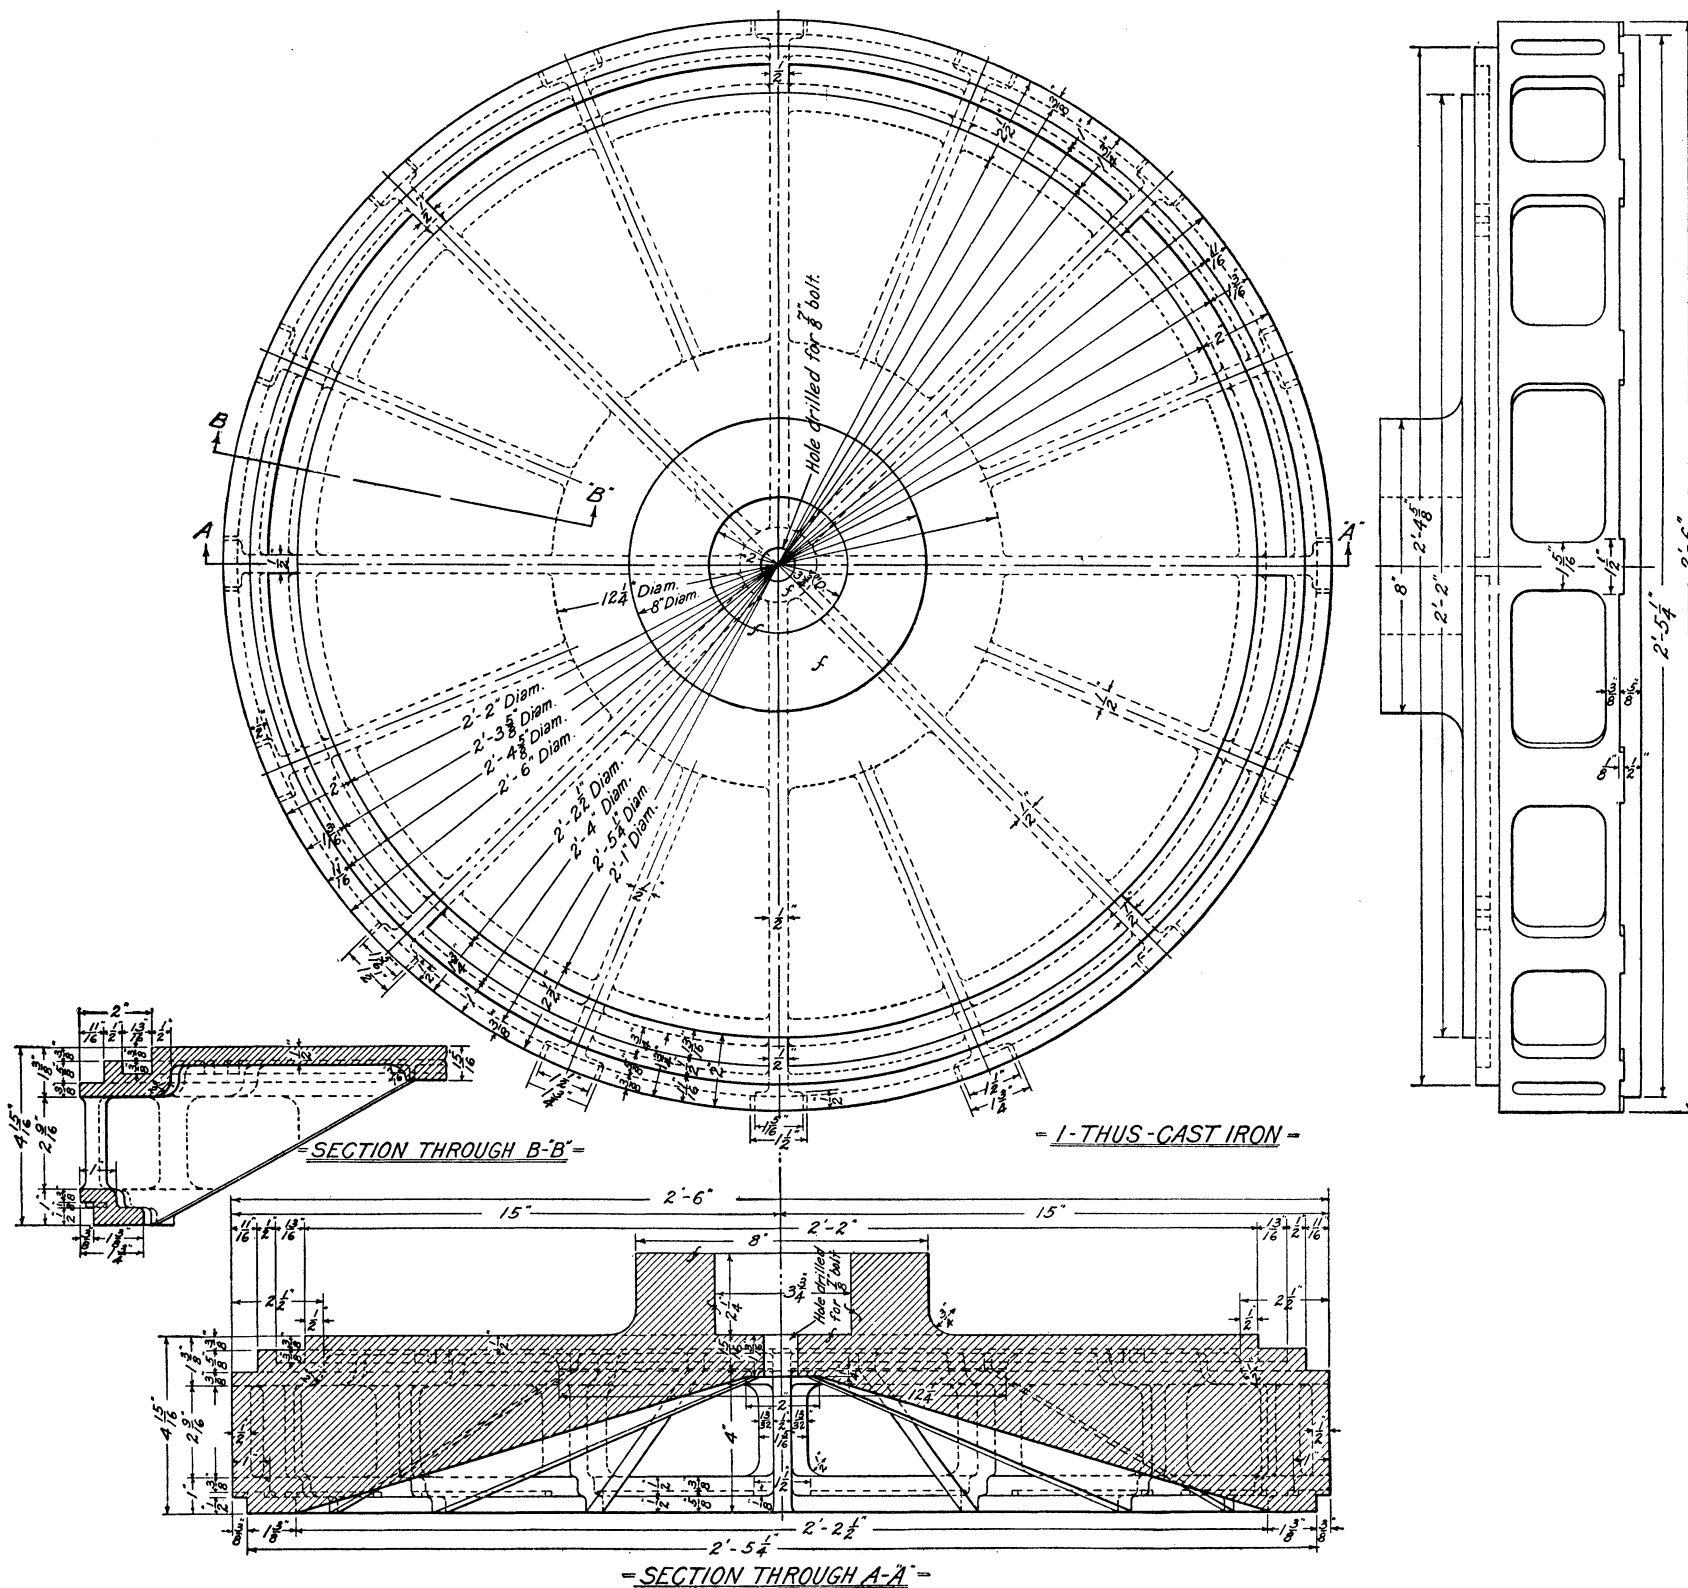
Details of center casting of cast-iron hearth, Bowie-Gavin furnace
